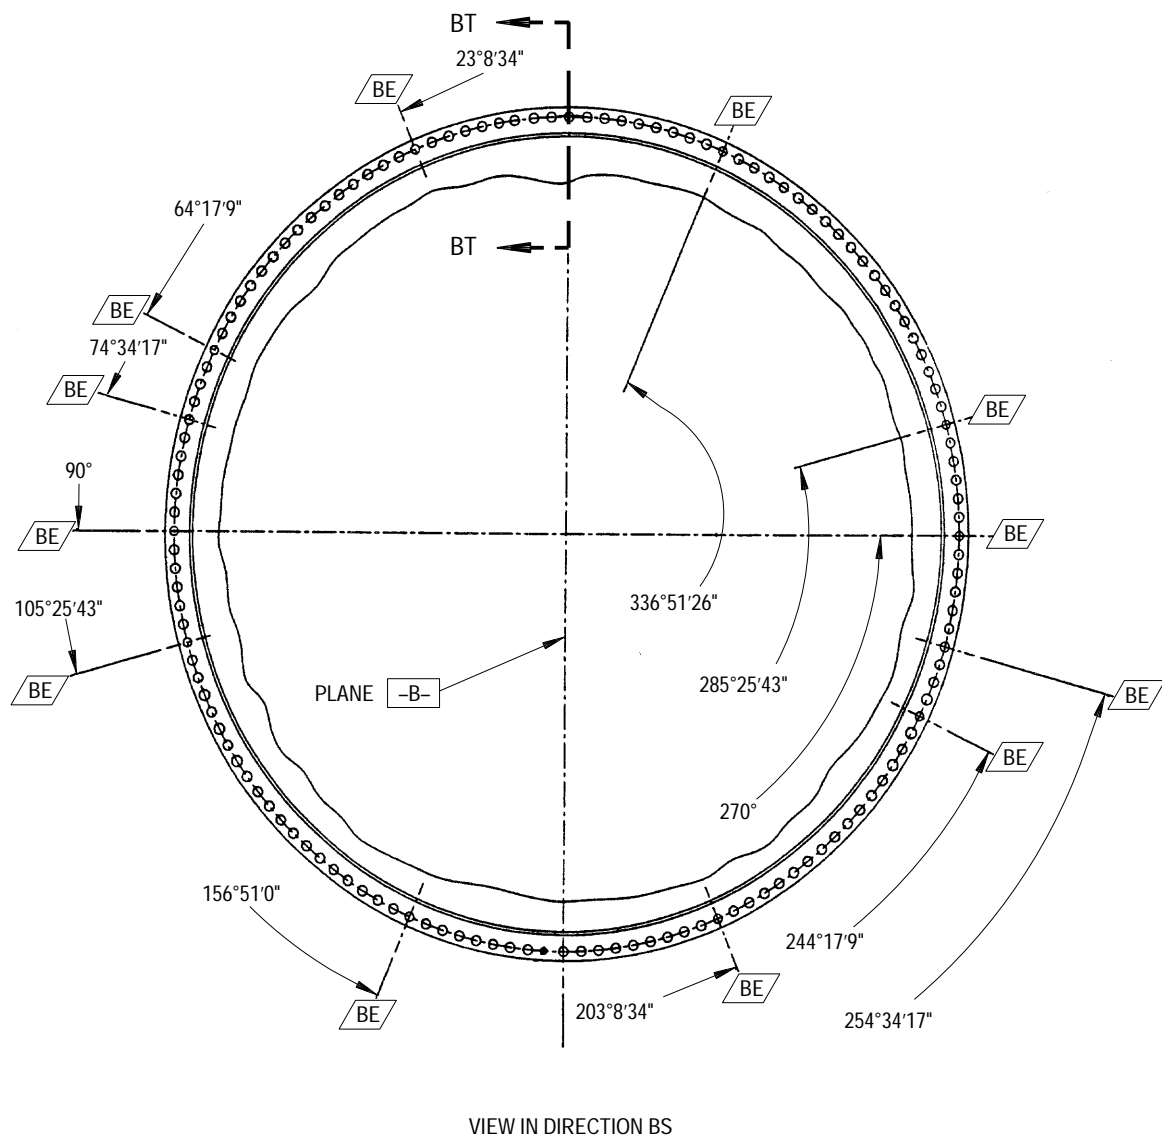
Diffuser Case Assembly - Shotpeen Requirements (Sheet 3 of 6)
